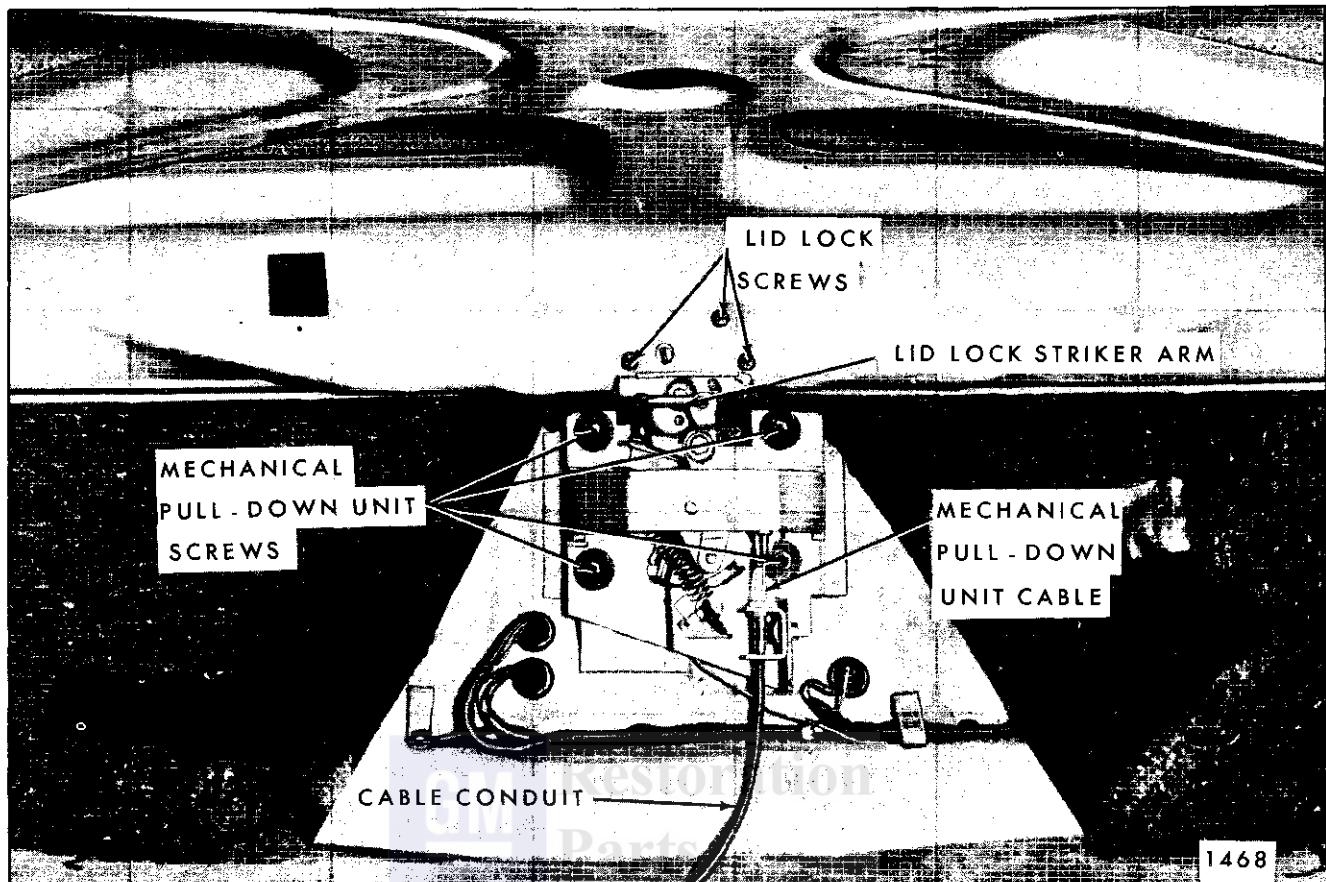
Rear Compartment Mechanical Pull-Down Unit - Cadillac Styles with Option
